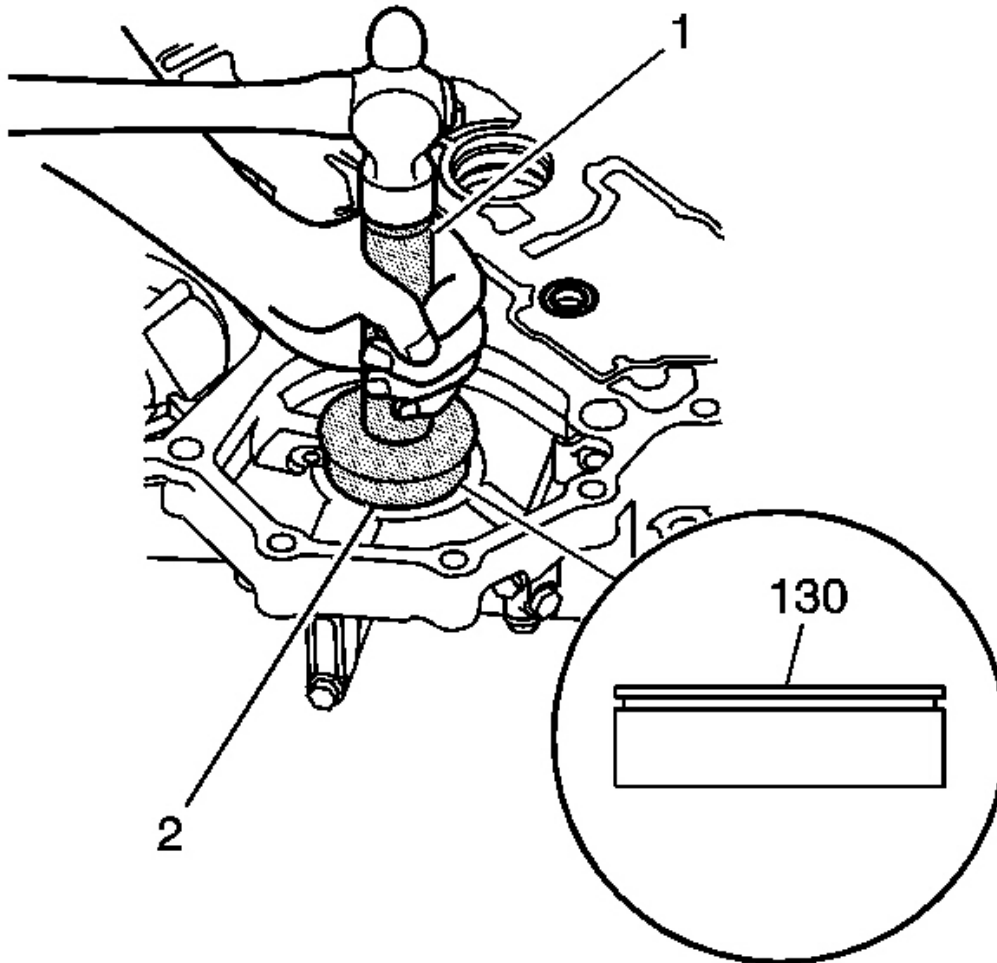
Installing The 1st/2nd Clutch Shaft Intermediate Bearing Using DT 46412 & EN 46342
